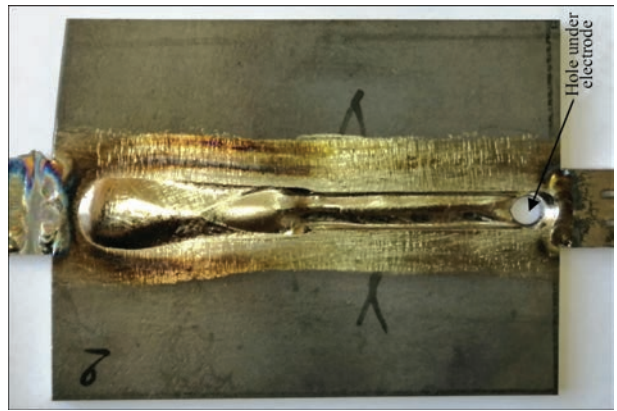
Example of welded joint of a sparsely-doped pseudo- β -alloy Ti-2.8Al-5.1Mo-4.9Fe, made by through penetration AAW without filler wire, mode No.1
